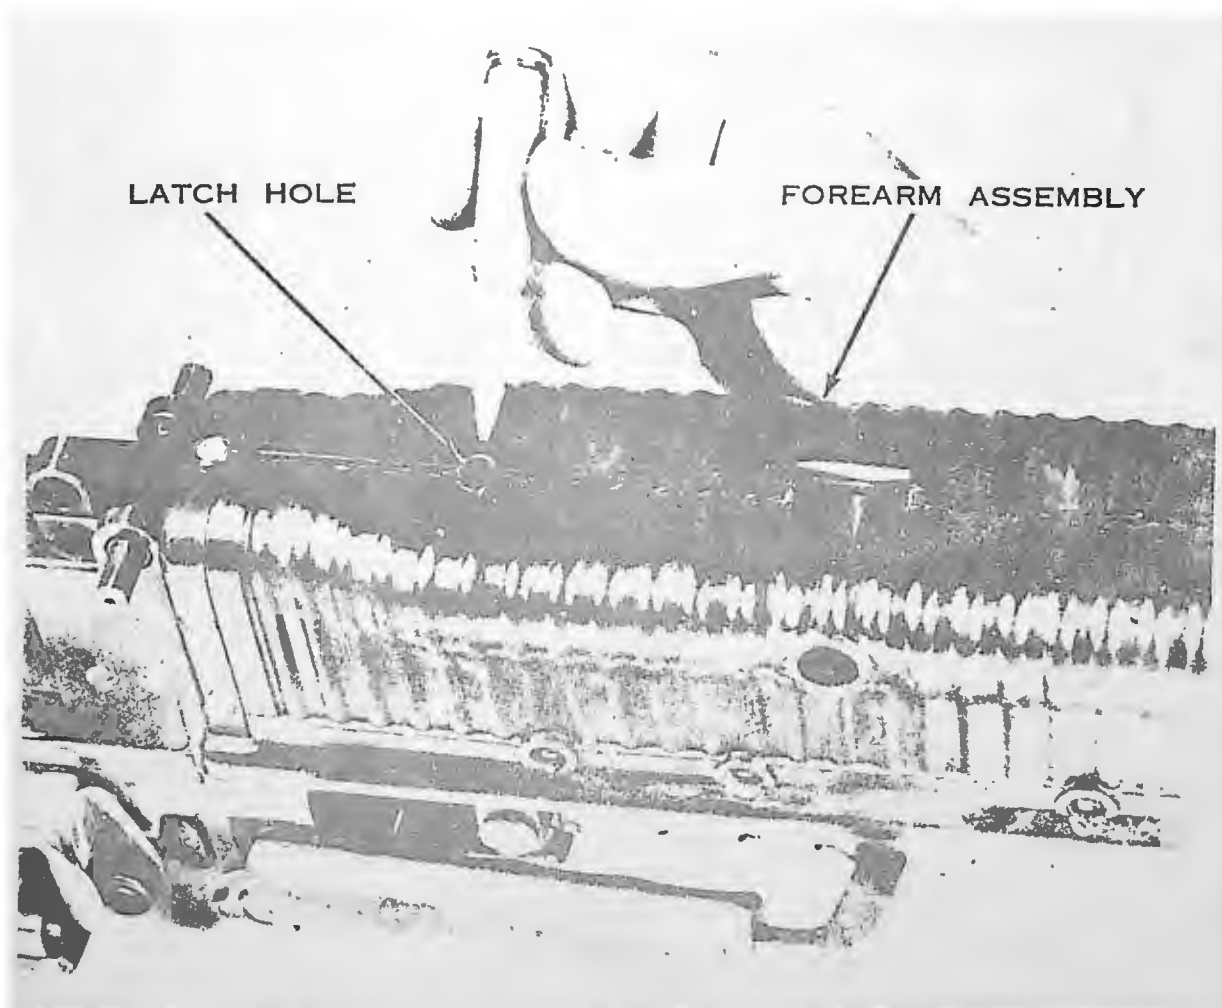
REMOVING THE FOREARM ASSEMBLY
